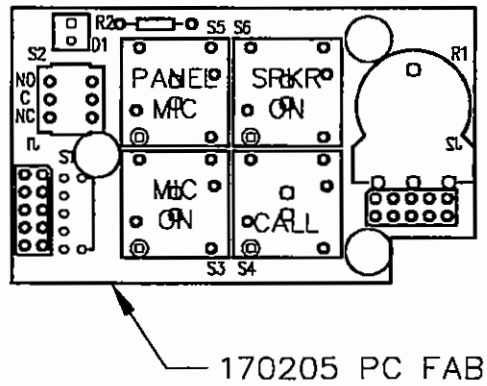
Assembly Drawing - ICS-52 Function Switch PCB Rev. A
